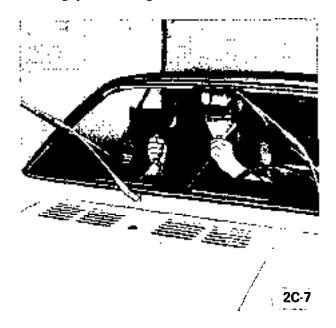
C-7 Pulling Rubber Channel Lip Over Pinchweld Flange
